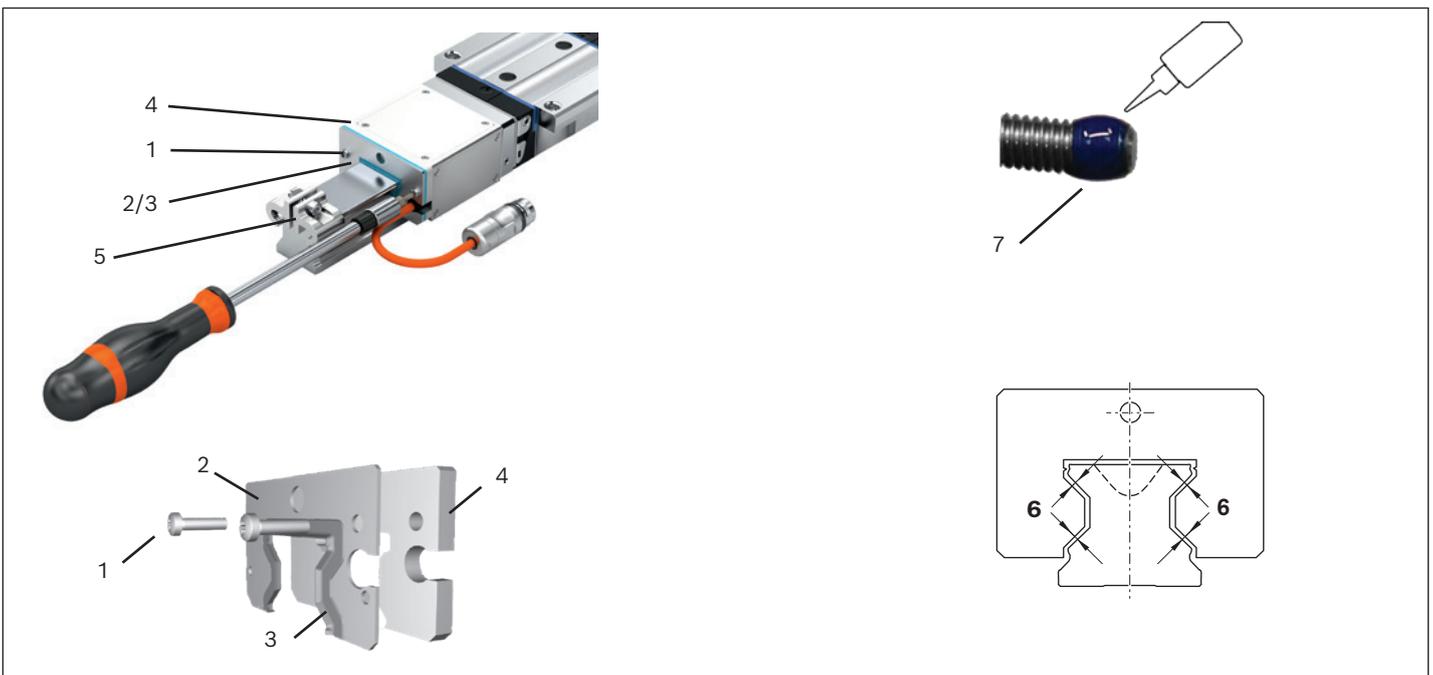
Changing the front seal / mounting the new front seal / Completing the mounting procedure
